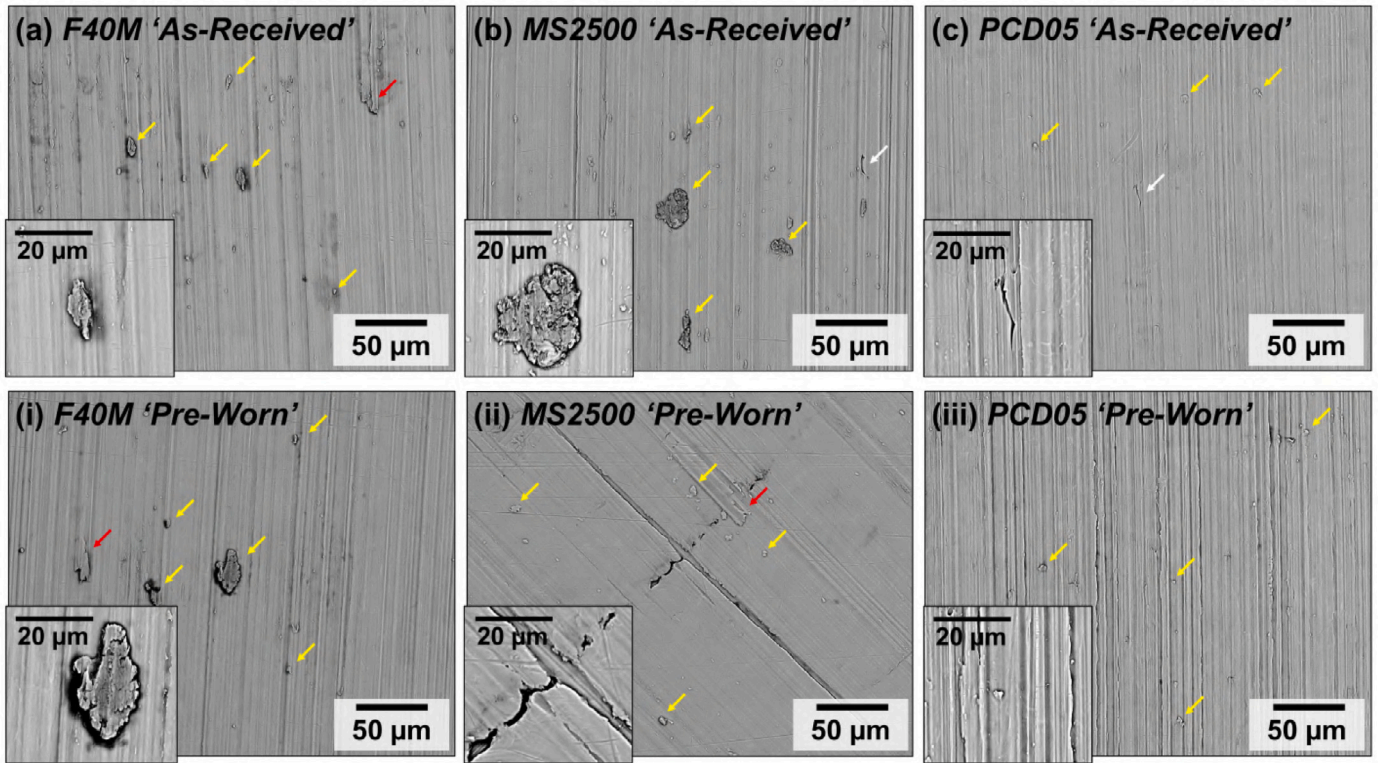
BSE images of the UD rolled surface condition following machining with: (a) the F40M, (b) the MS2500, and (c) the PCD05 tool grades in their as-received condition. Respective surfaces following machining with tooling in the pre-worn condition are shown in (i)–(iii). Machining induced surface anomalies are highlighted showing micro-welded Ti-6Al-4V “pick up” deposited from the tool (yellow arrows), surface micro-cracking (white arrows), and material smearing (red arrows). Cutter feed direction is from left-to-right.
